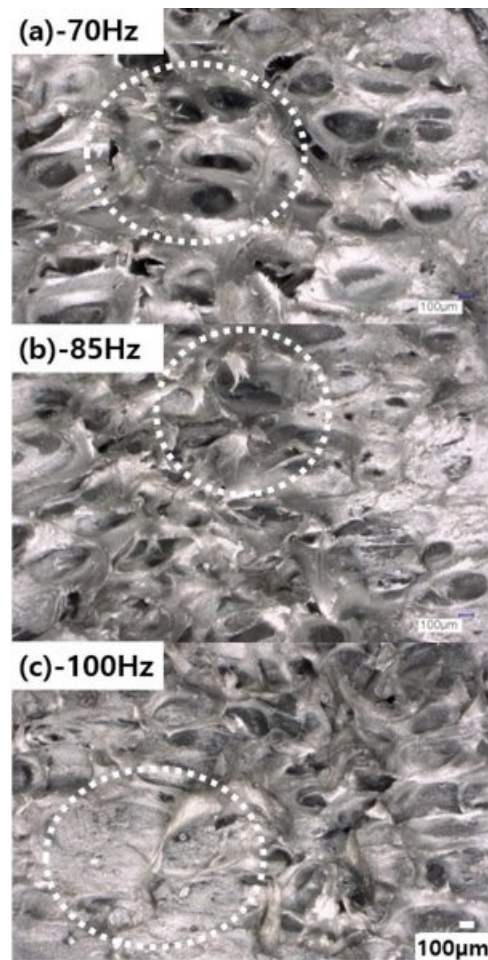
OM images of the fractured surfaces after vibration welding of PP foam (ratio 15%).
